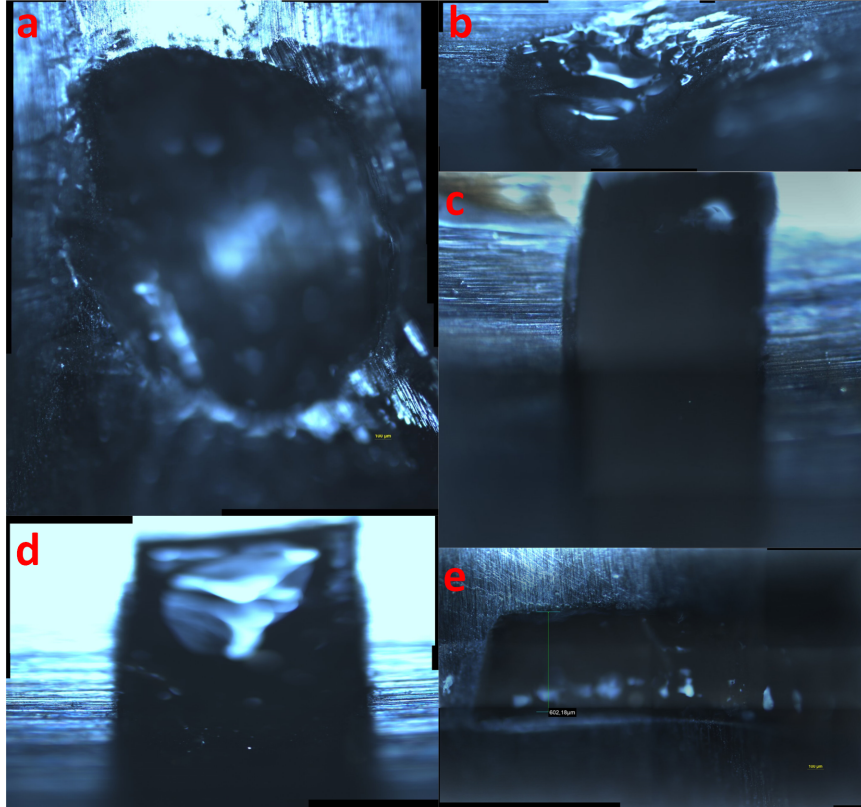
Microscopic images of artificially induced bearing faults: (a) inner race (IR) fault on the bottom bearing created using a handheld drill mill, (b) outer race (OR) fault on the bottom bearing created using a handheld drill mill, (c) laser-induced 0.5 mm OR fault on the top bearing, (d) laser-induced 1.0 mm OR fault on the bottom bearing, and (e) laser-induced 0.5 mm IR fault on the bottom bearing.
